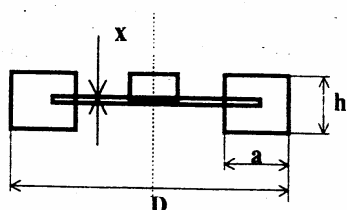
Rushton turbine and six-blade turbine impeller (see Table 1 for dimensions).
